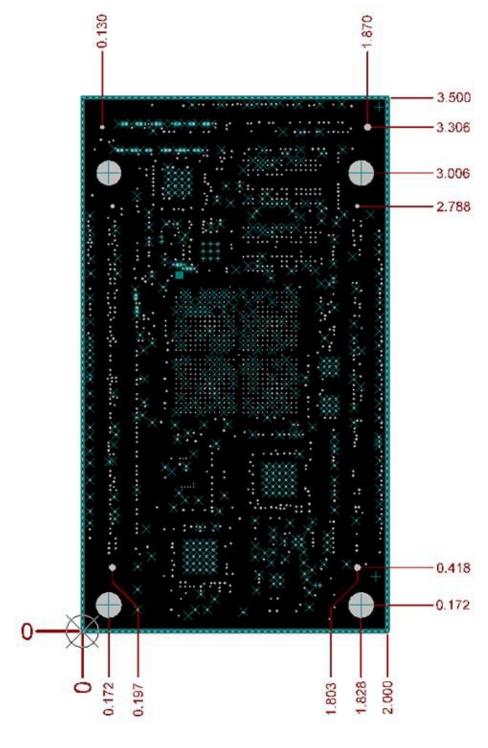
UltraZed-EG SOM Top View Mechanical Dimensions
